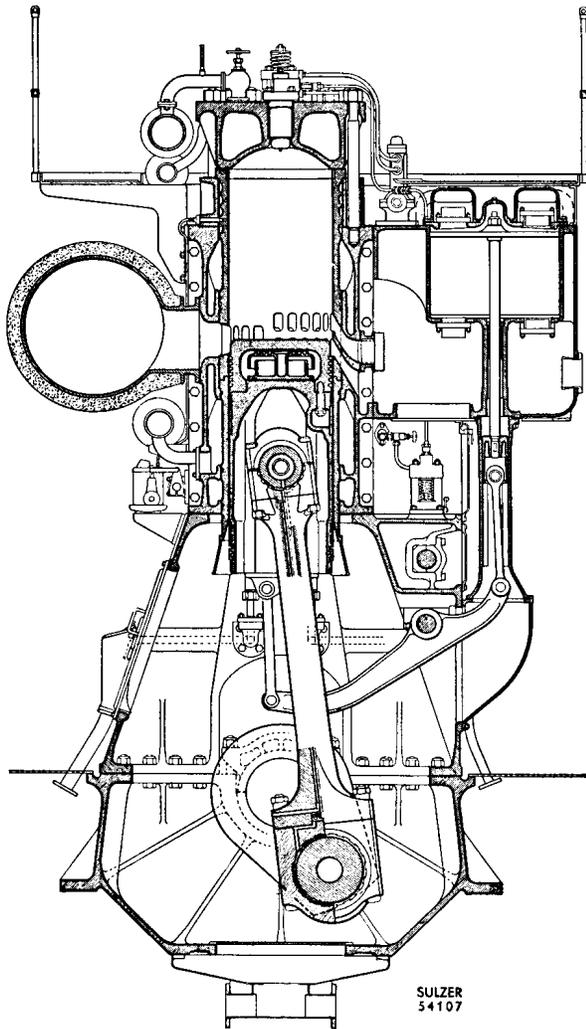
Sulzer 22 × 39.4 in., 165 Rpm Engine with Welded Steel Exhaust Header.
